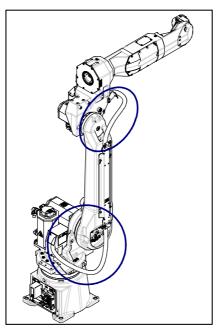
(a) Inspection points of the mechanical unit cables
